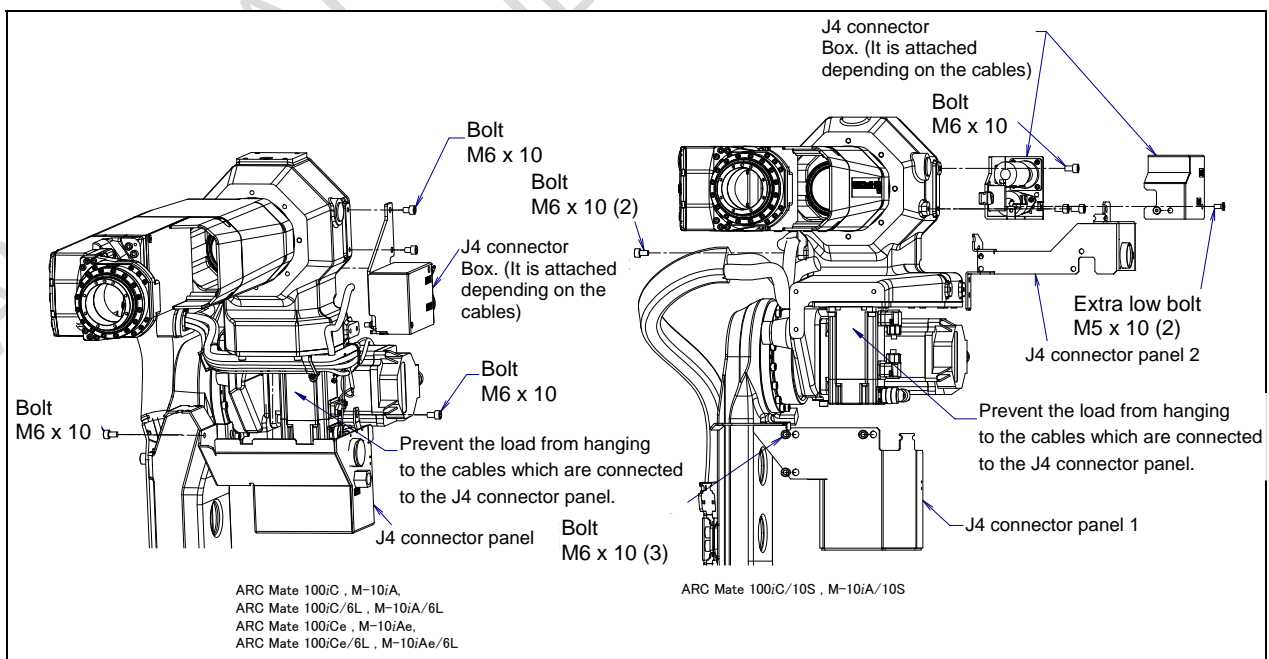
(h) Replacing cable kit (J4 connector plate part)
